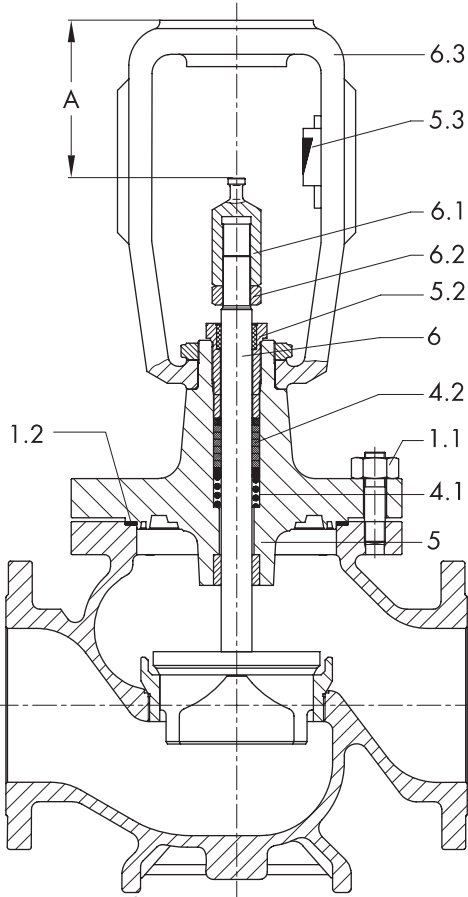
· Sectional drawing of Type 3241 in nominal sizes DN 200 and 250
